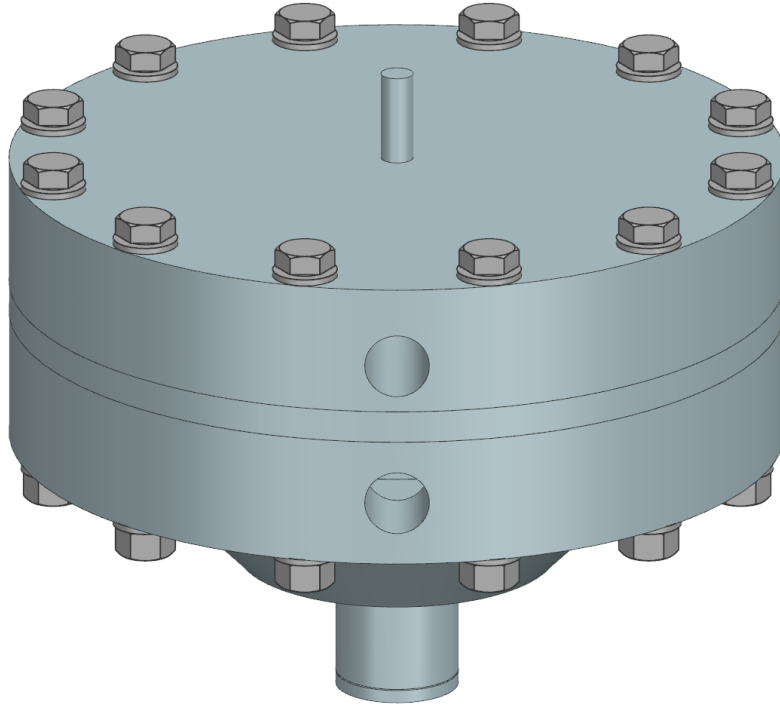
Top view of the completed injector design. Bolts are hex head DIN M5x50.
